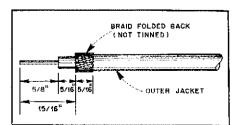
Cable prepared for connector mounting per KG6QY's suggestion.
